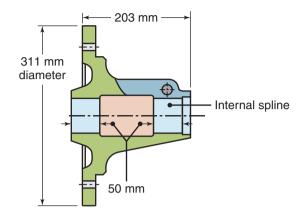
Example of a part with internal splines that were produced by broaching.
